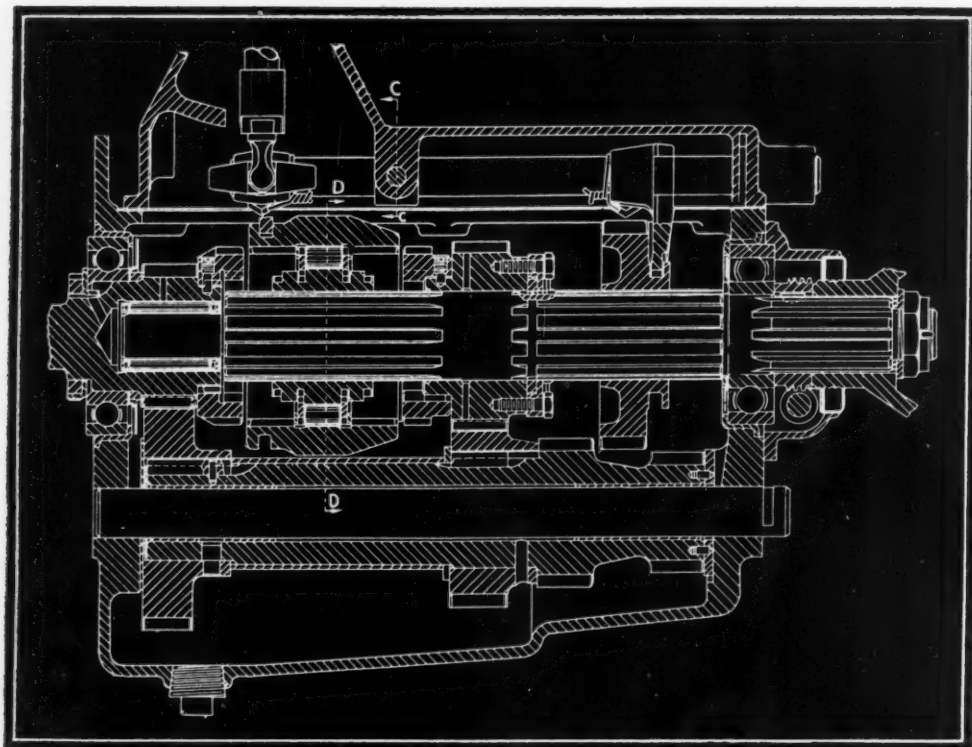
(Above)—Section of free-wheel mechanism taken on line D-D. Note the three sets of rollers and the light springs for holding the rollers in the engaging position
